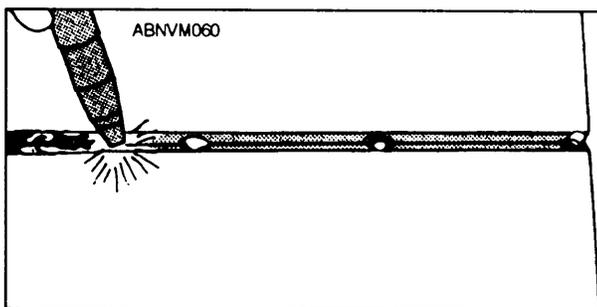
Moving the welding gun forward at the proper angle.
